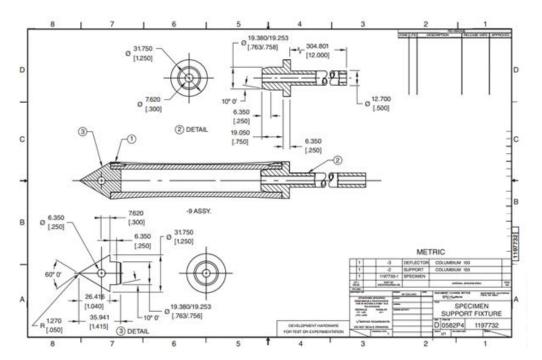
Working drawing assembly, also referred to as detail assembly
